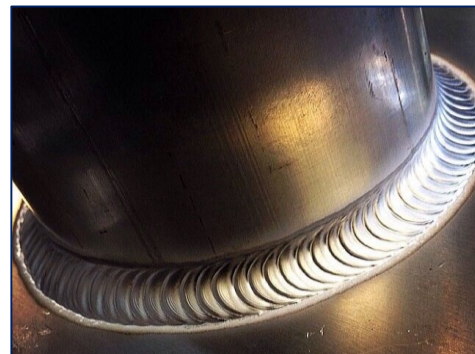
TIG welded pieces [24] [25]
